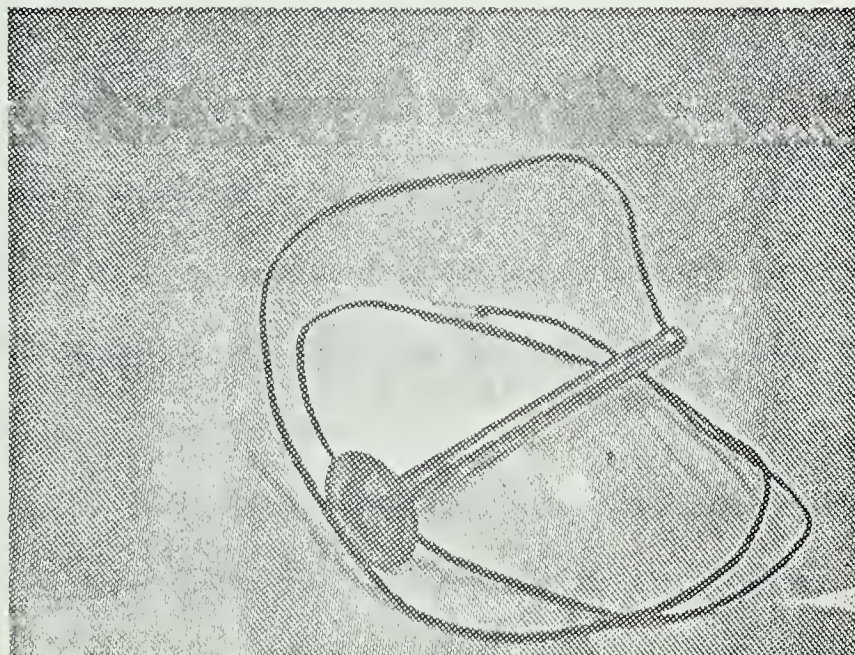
WELD STEEL EXHAUST VALVE
